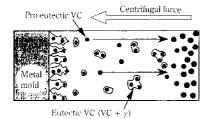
Segregation mechanism of V carbide in inner surface side of a high C-high V steel roll during centrifugal casting
